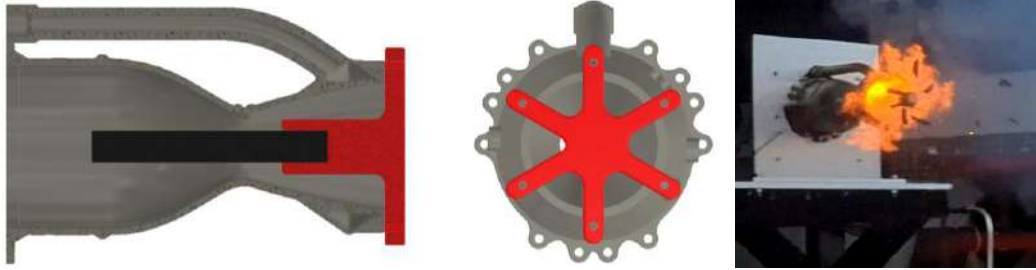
Left: Half section and Centre: nozzle frontal view of ignitor mount (red) and sparkler (black), Right last years igniter being ejected from the combustion chamber from Appendix B.6 - Oct 2024 Full Stack Testing Summary.
